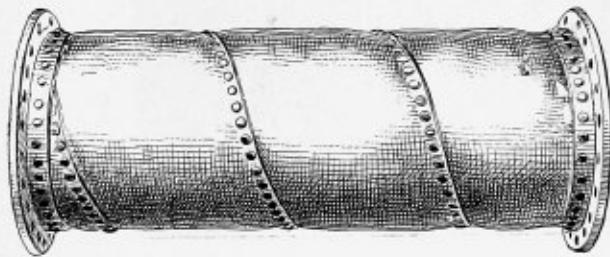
Spiral Riveted Pipe after Test for Bursting Pressure
